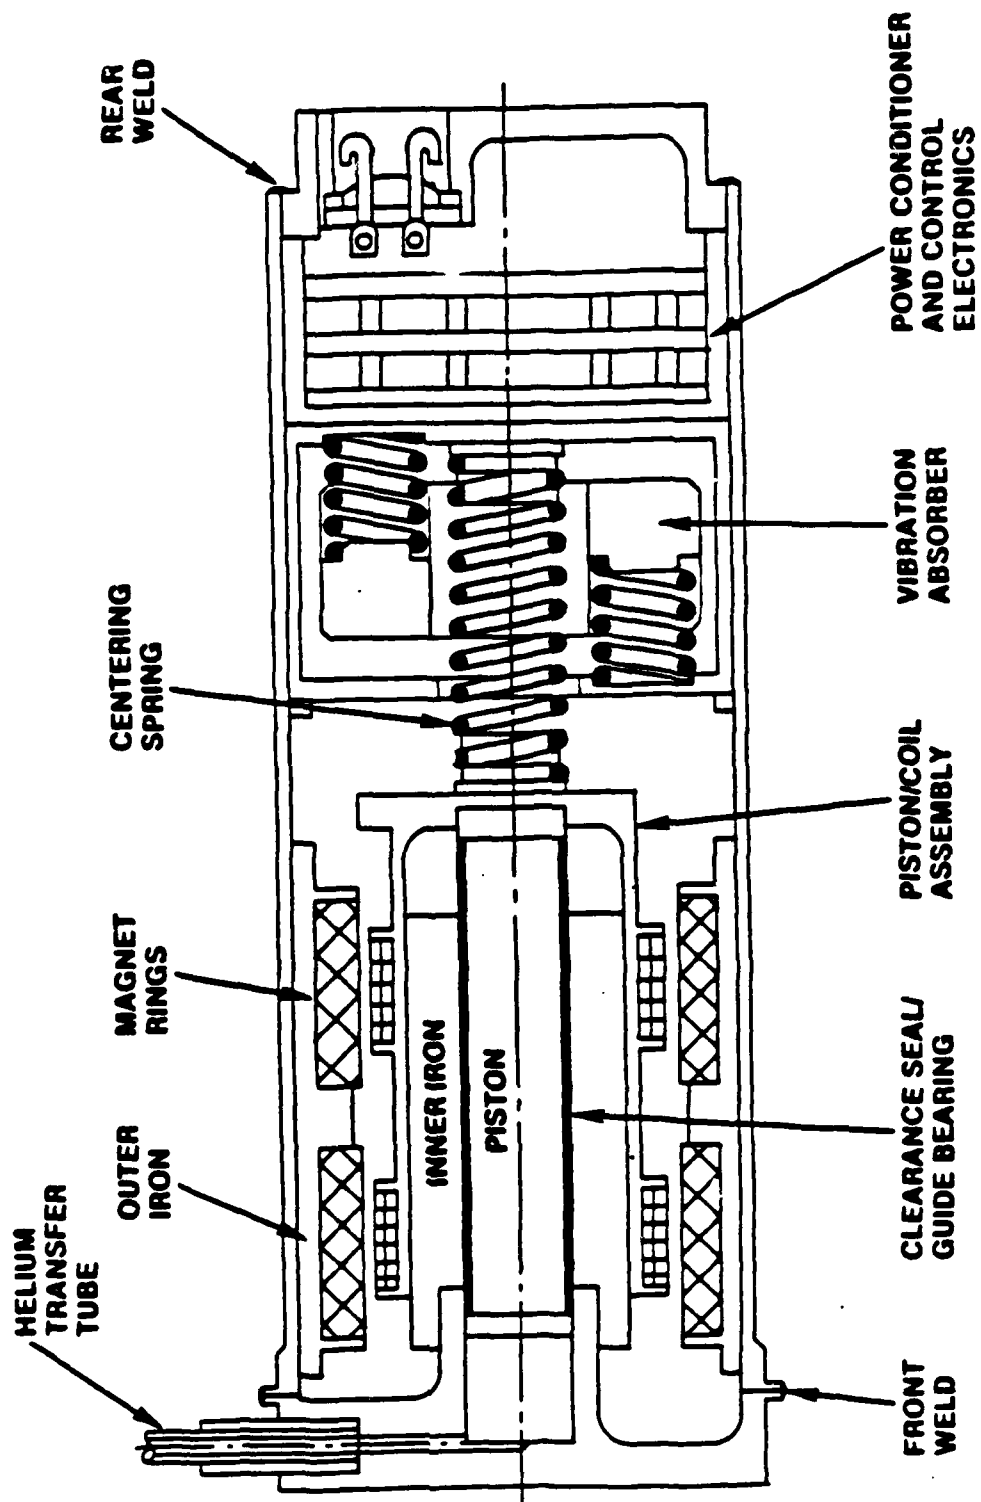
Illustration of Magnavox Linear Cooler Compressor
